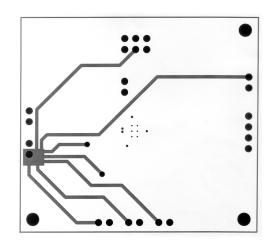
Recommended NHW PC Board Layout: Inner Layer 2
